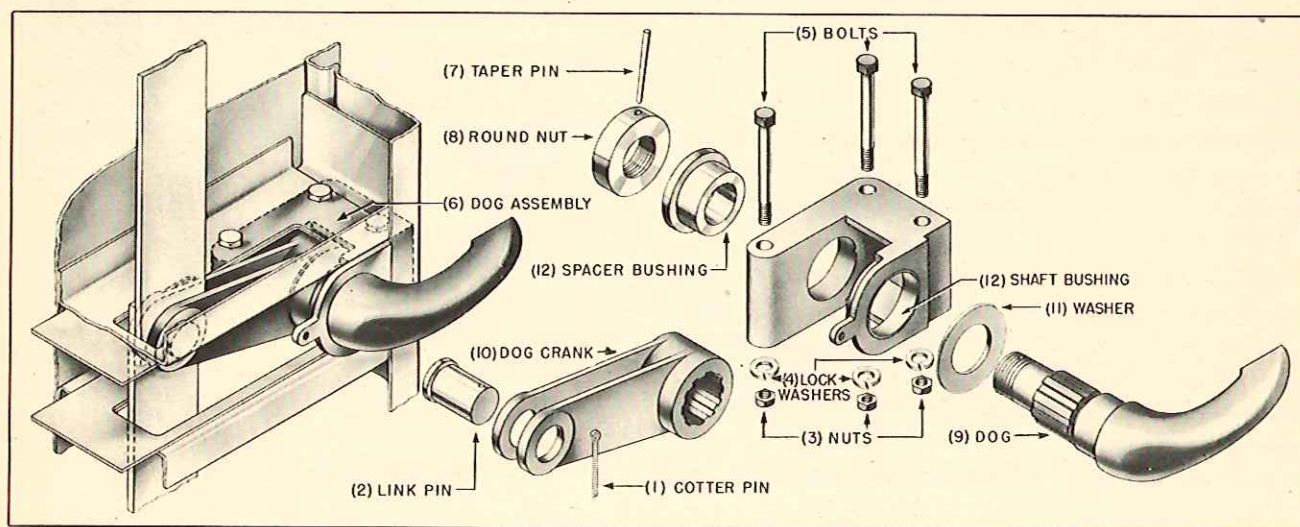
Dog, assembly and exploded views, TLD-2(crs) door.
